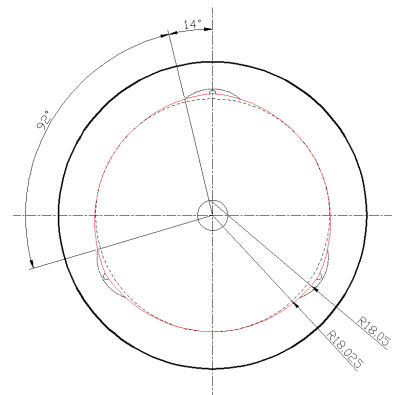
Drawing of a supporting 3-lobe journal bearing
